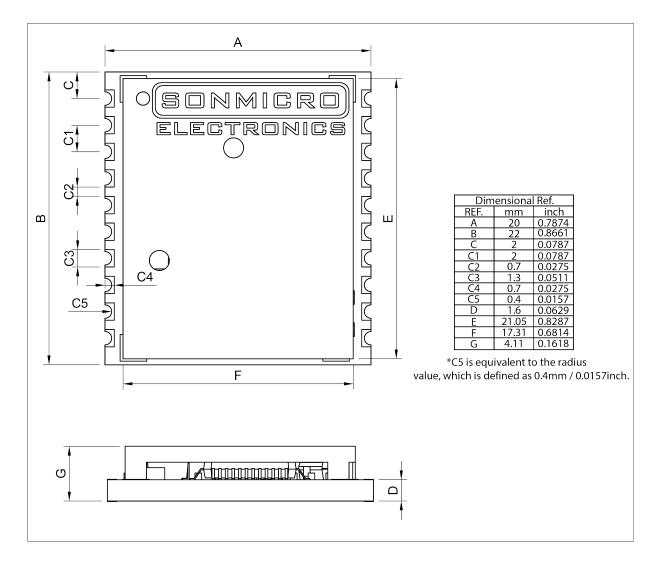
SM5211-SMD Mechanical Drawing with Shield (SMD20 Package)
